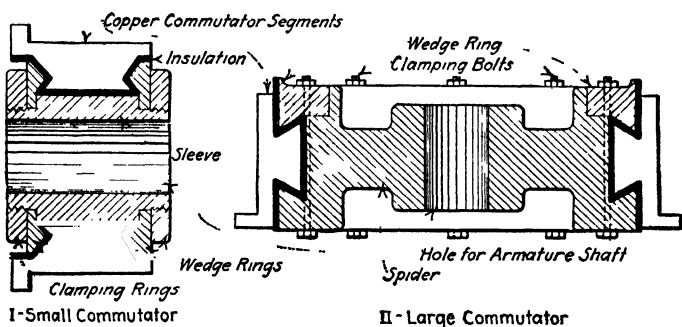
Sectional views illustrating typical construction of a small and a large commutator
